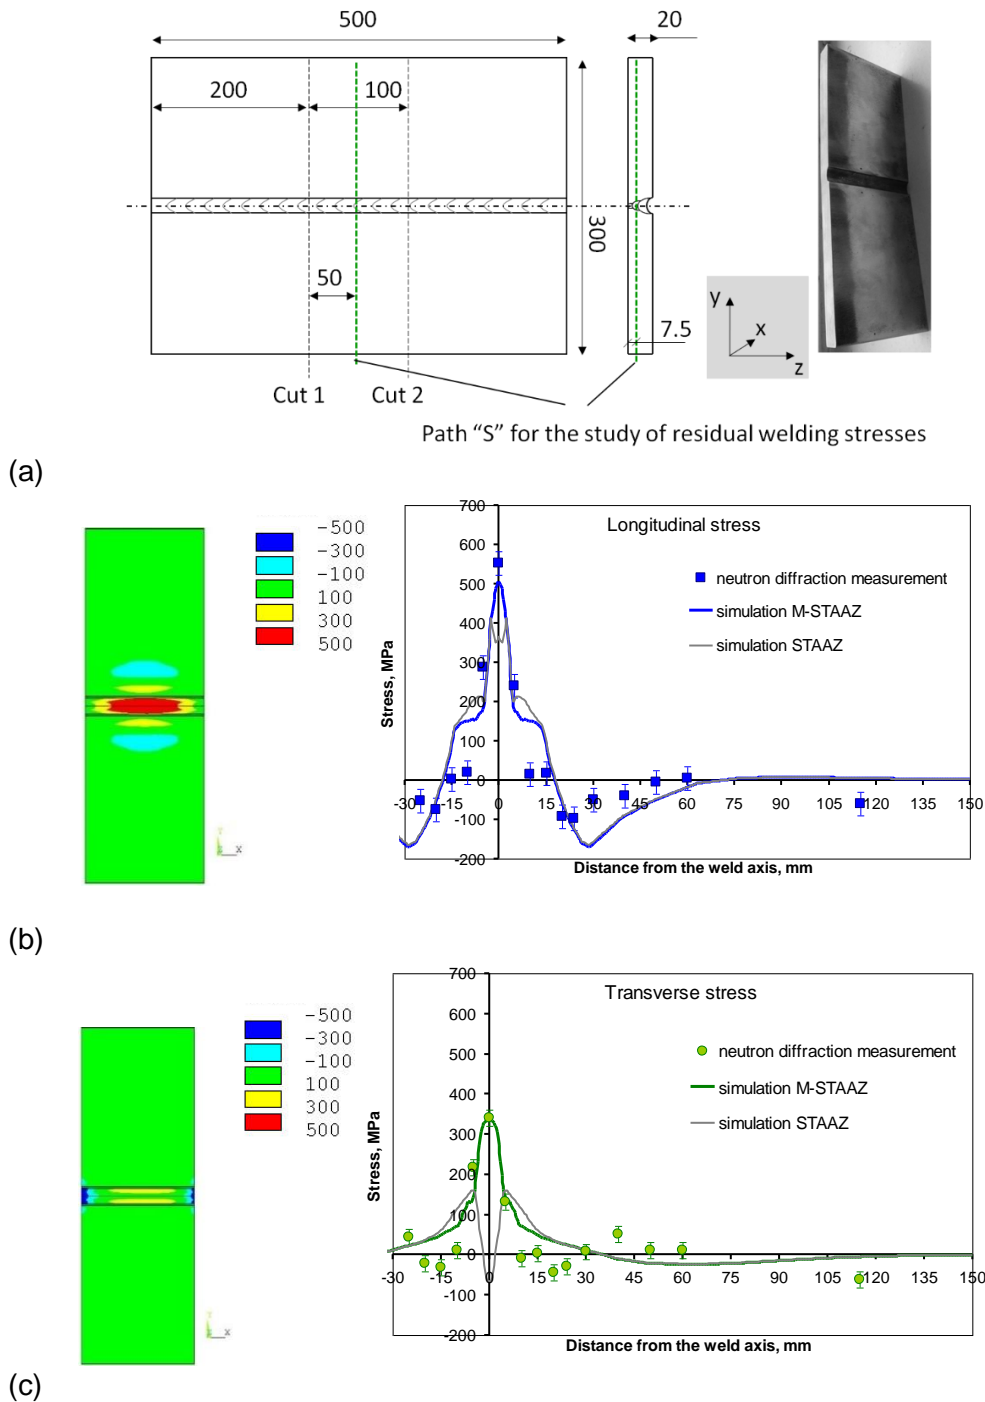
Sample cut from a thick (~ 20 mm) plate welded with multi-pass submerged arc welding (SAW-welding). "S" is a scan-line in neutron measurements. Arrows indicate the strain tensor components (X, Y, Z) (a). Full map of distribution of the longitudinal component (σ_X) in the tensor of residual stresses calculated by the finite element method (FEM) and the comparison of the experimentally measured σ_X -values along the scan-line "S" with the results of numerical modeling by the finite element method FEM (solid line) (b). Full map of distribution of the transverse component (σ_Y) in the tensor of residual stresses calculated by the finite element method (FEM) and the comparison of the experimentally measured σ_Y -values along the scan-line "S" with the results of the numerical modeling by the finite element method FEM (solid line) (c).
